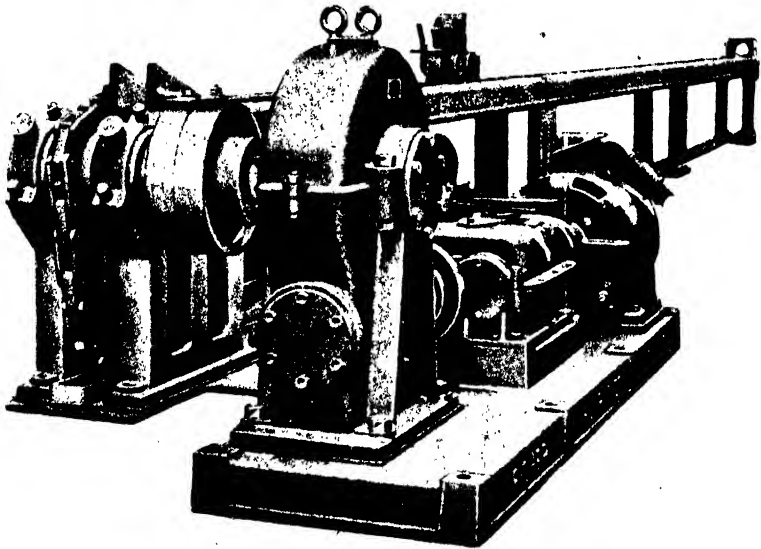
SINGLE DRAW-BENCH AND 25 H.P. DRIVE
